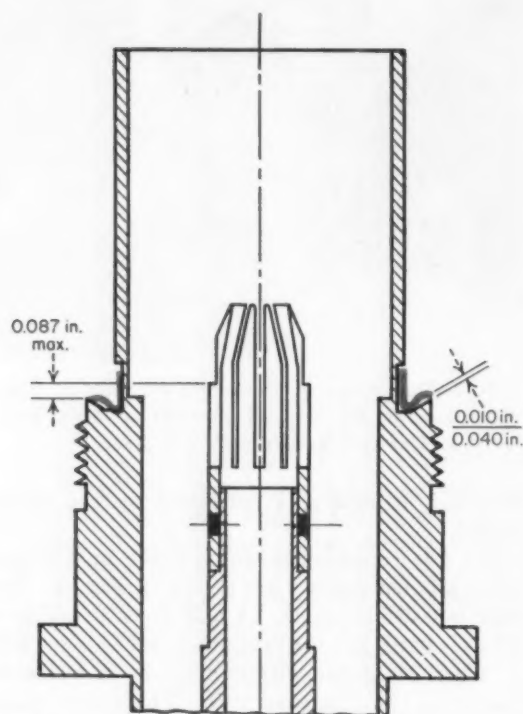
Cross section of Magnatron clamp assembly shows the beryllium spring in color. Close tolerances must be held in this assembly.
